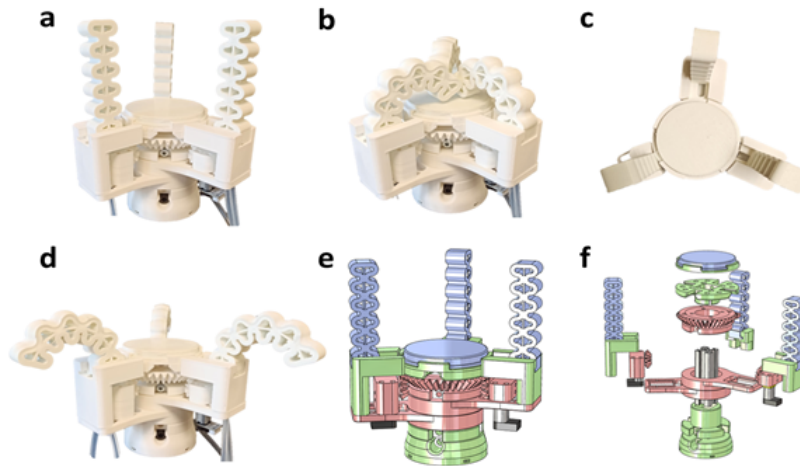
Proposed soft gripper design. (a) Manufactured soft gripper in normal pose. (b) Fully close position. (c) Top view. (d) Fully open position. (e) CAD view. In blue, the parts made of flexible filament, in red the rigid parts in charge of the movement of the soft actuators, and in green, the structural parts of the soft gripper. (f) Exploded CAD view.
